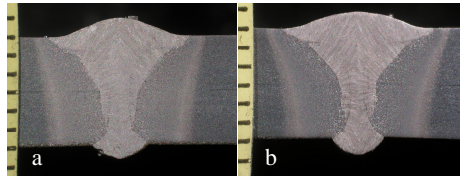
GMA welded joint, filler material: OK 12.51.
